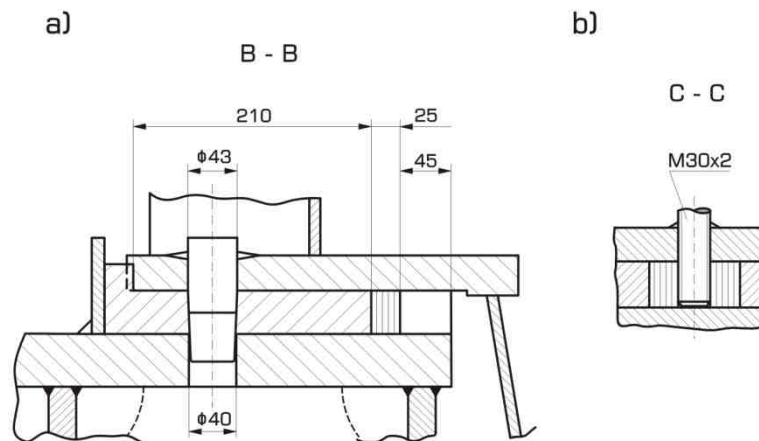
Chock cross sections: a) section B-B showing position and dimensions of the chock hole for the foundation bolt, b) section C-C showing the position of bolt aligning between chocks
